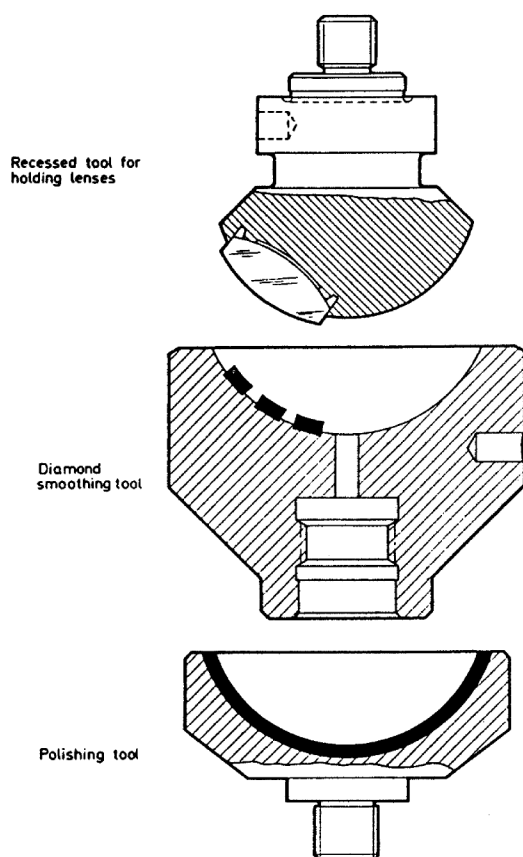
Recessed tool for holding lenses, diamond lapping tool and plastic and/or pitch polishing tool (ref. 3).
